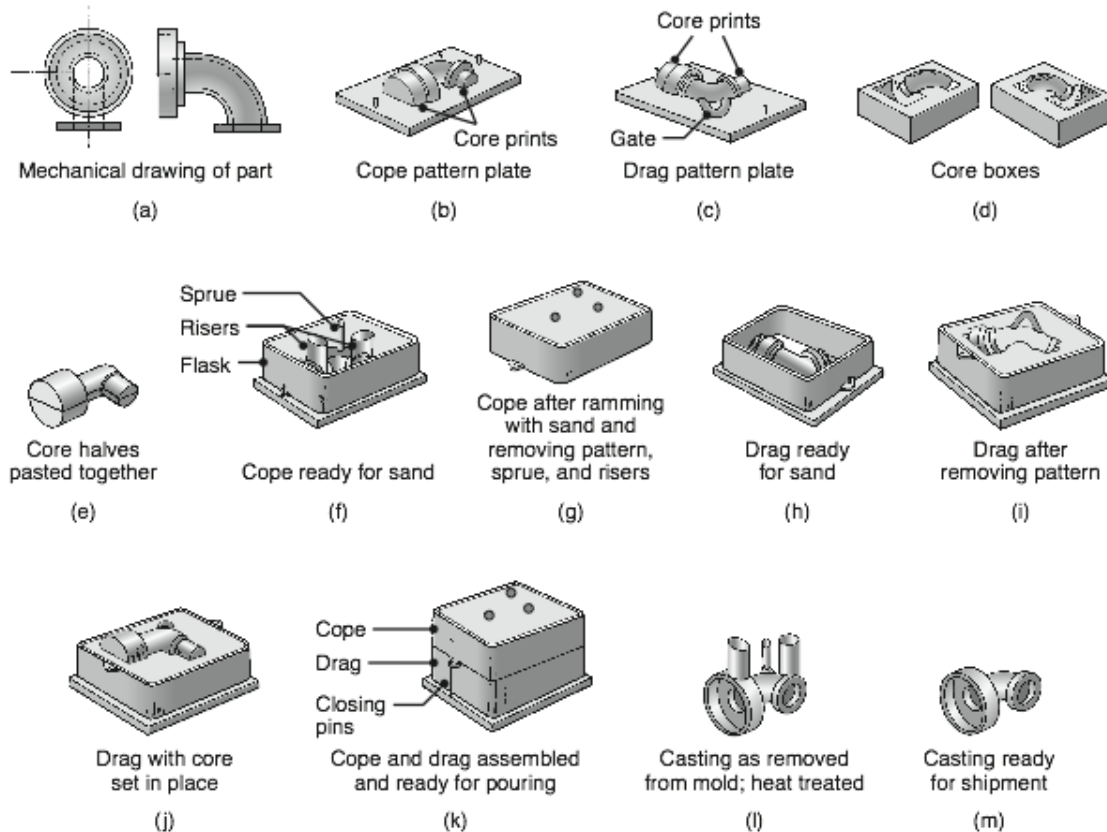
Schematic illustration of the sequence of operations in sand casting. (a) A mechanical drawing of the part, used to create patterns. (b-c) Patterns mounted on plates equipped with pins for alignment. Note the presence of core prints designed to hold the core in place. (d-e) Core boxes produce core halves, which are pasted together. The cores will be used to produce the hollow area of the part shown in (a). (f) The cope half of the mold is assembled by securing the cope pattern plate to the flask with aligning pins, and attaching inserts to form the sprue and risers. (g) The flask is rammed with sand and the plate and inserts are removed. (h) The drag half is produced in a similar manner. (j) The core is set in place within the drag cavity. (k) The mold is closed by placing the cope on top of the drag and securing the assembly with pins. (l) After the metal solidifies, the casting is removed from the mold. (m) The sprue and risers are cut off and recycled, and the casting is cleaned, inspected, and heat treated (when necessary). *Source:* Courtesy of Steel Founders' Society of America.
